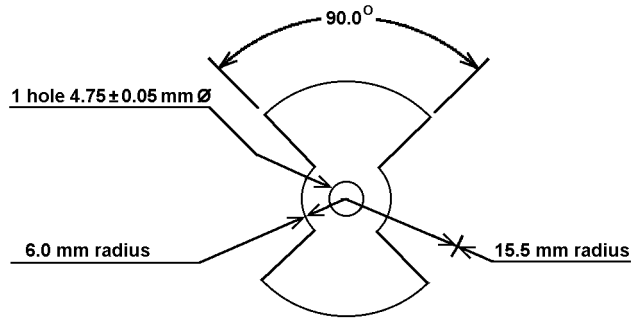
, Model 652-1 Chopper Blade Dimensions
